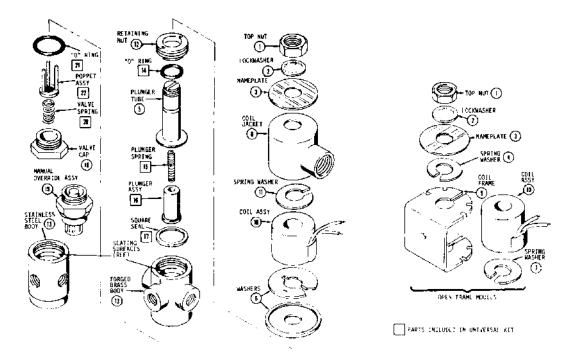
Exploded View of Typical S333. Standard and Open Frame Models.
